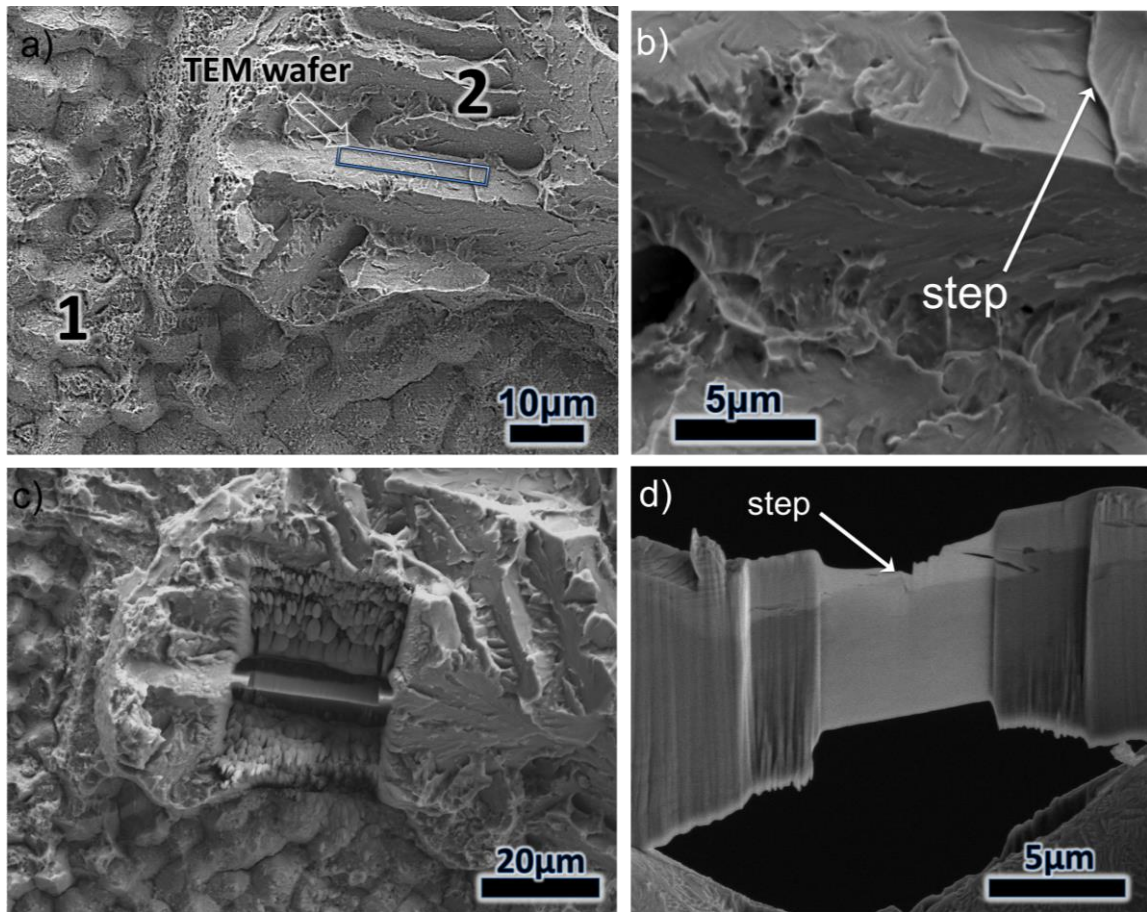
Retrieved subsea 8630-Alloy625 specimen fracture surface after SENB testing showing a) the 8630 steel side with crater-like failure (1) terraced cleavage-like failure (2), and b) a higher magnification image of the ‘step’; c) Fracture surface after TEM thin-foil extraction and d) TEM sample mounted on Cu grid.
